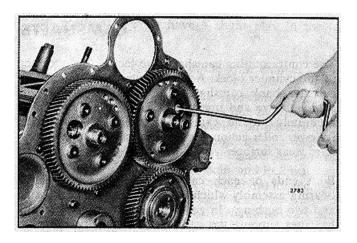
Removing or Installing Camshaft End Bearing Retaining Bolts
